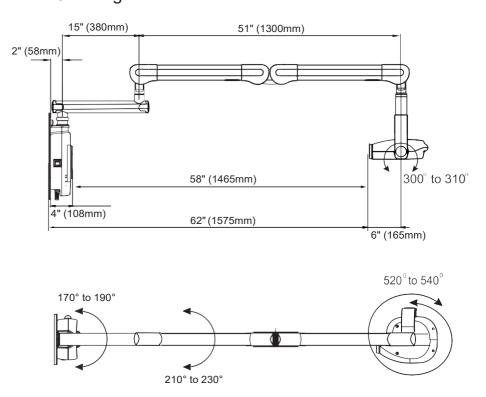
Wall Mounted ImageScan HD 15" Support Tube Fully Extended Right Side and Top Views
